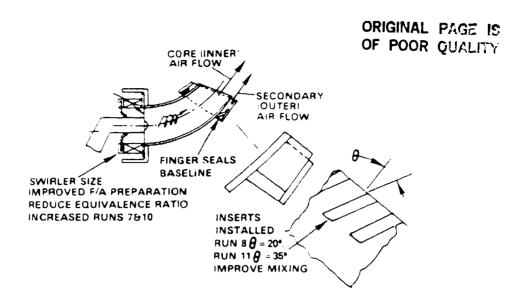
Main Zone Fuel Injector Assembly Showing Modified Axial and Secondary Airflow Sleeve (Swirlers)
